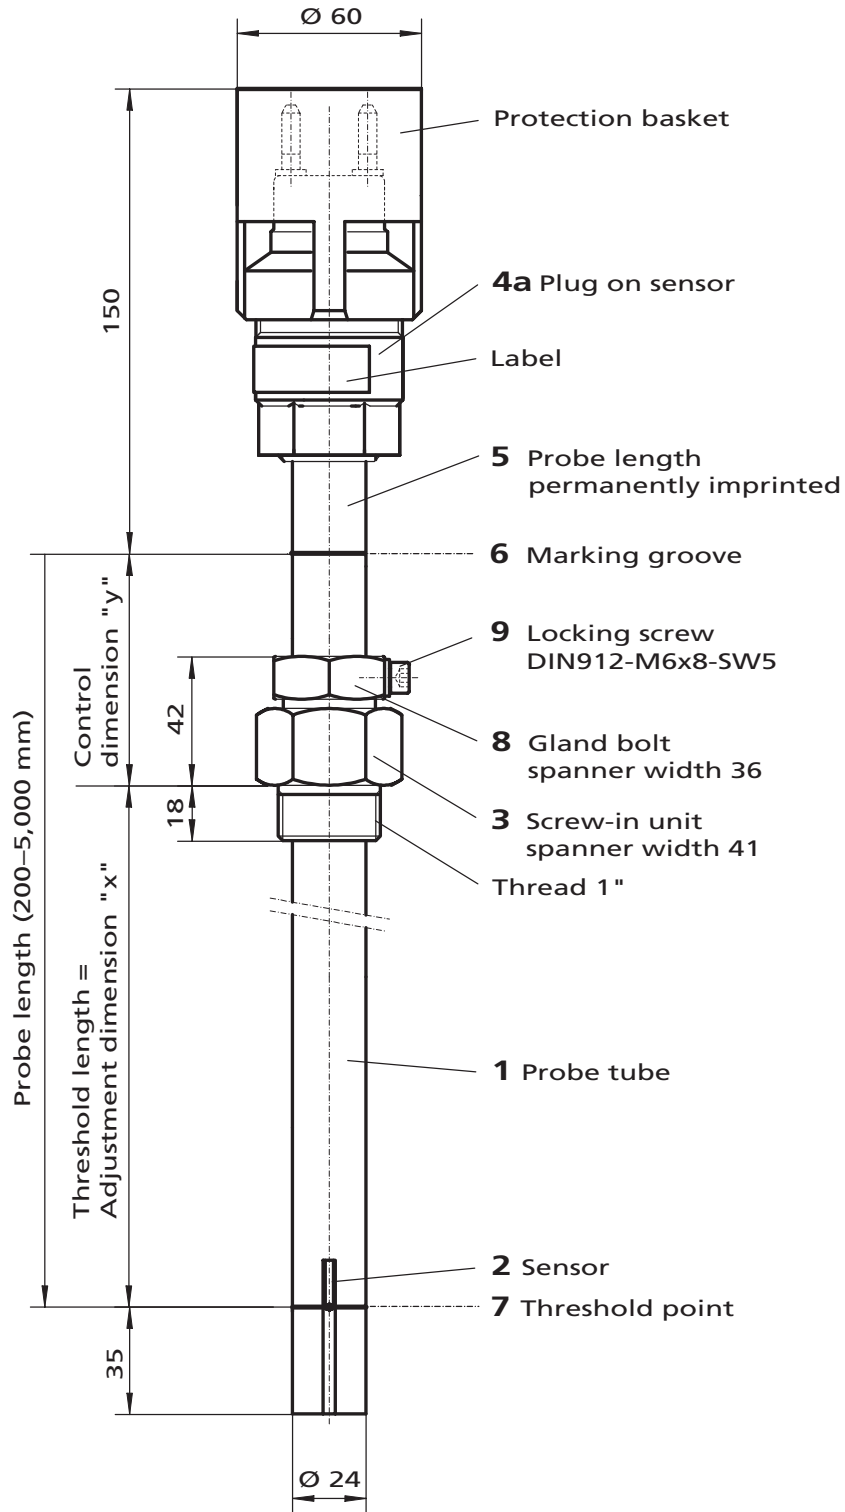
Overfill prevention sensor 83 UV with plug on sensor
